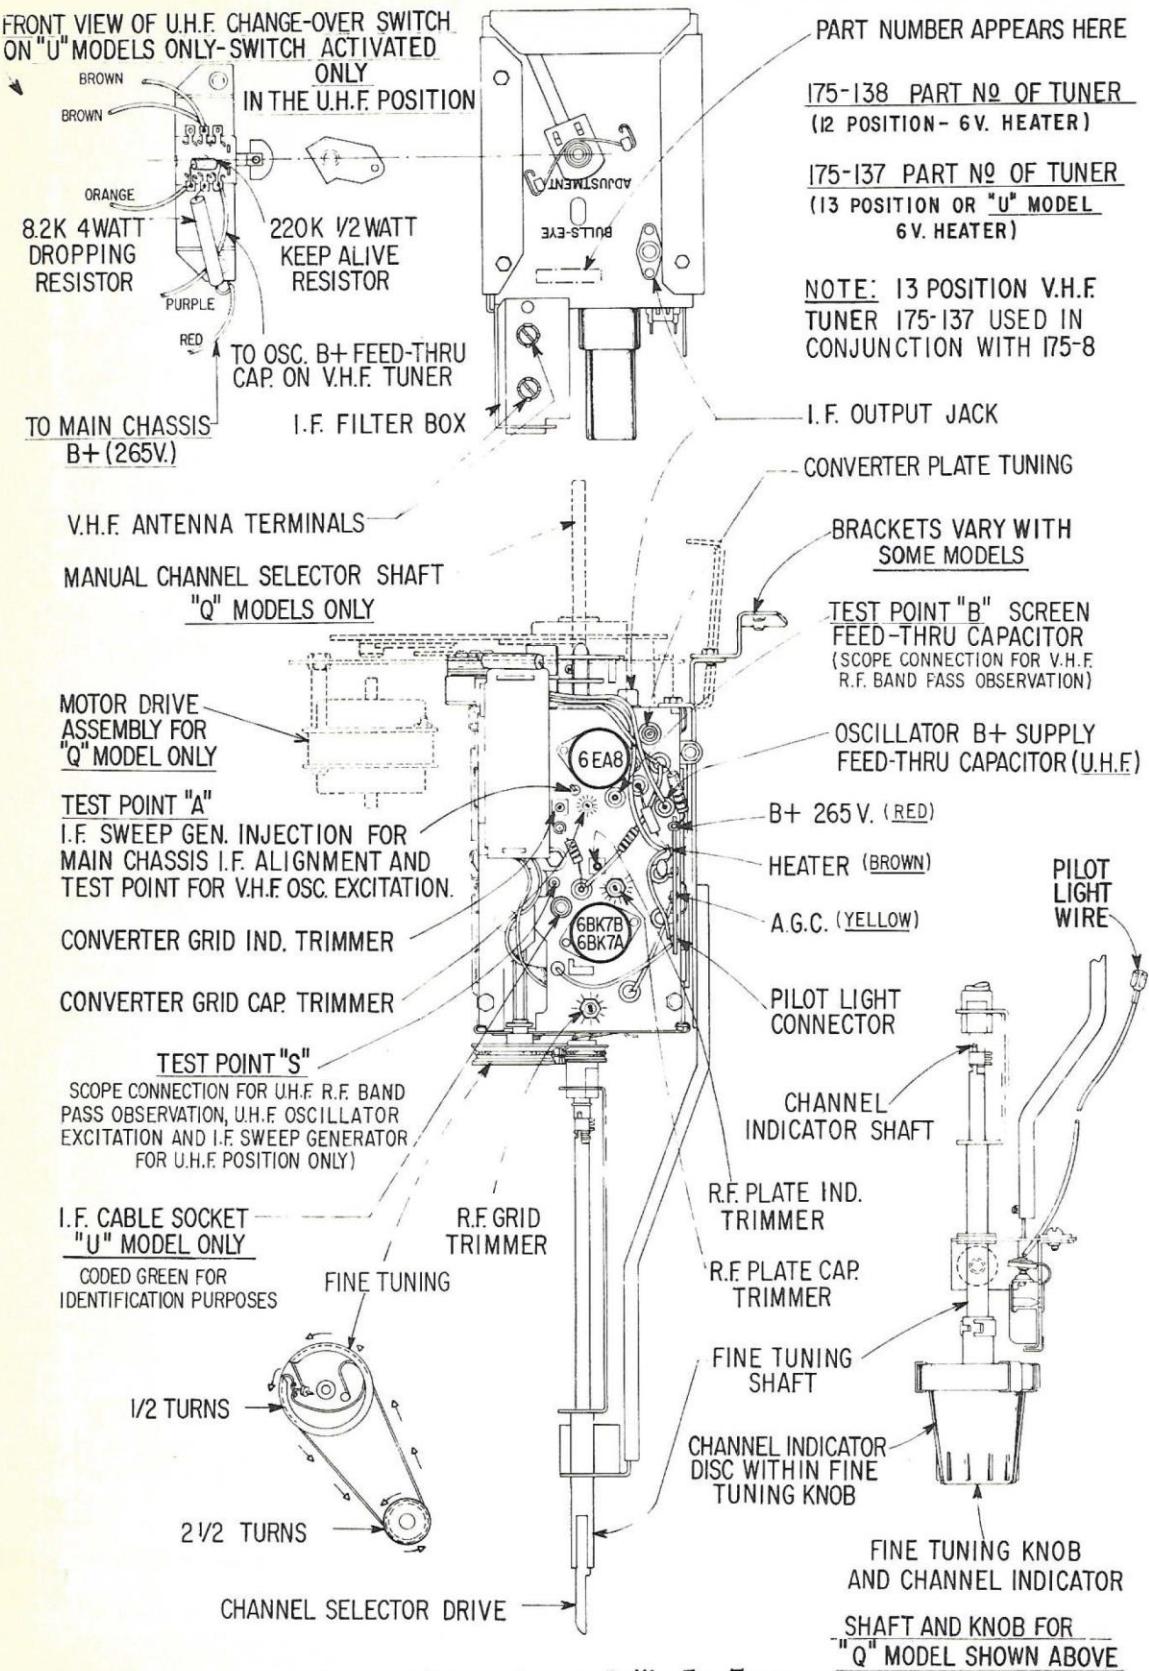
Tube and Trimmer Layout, Bull's Eye Tuner
